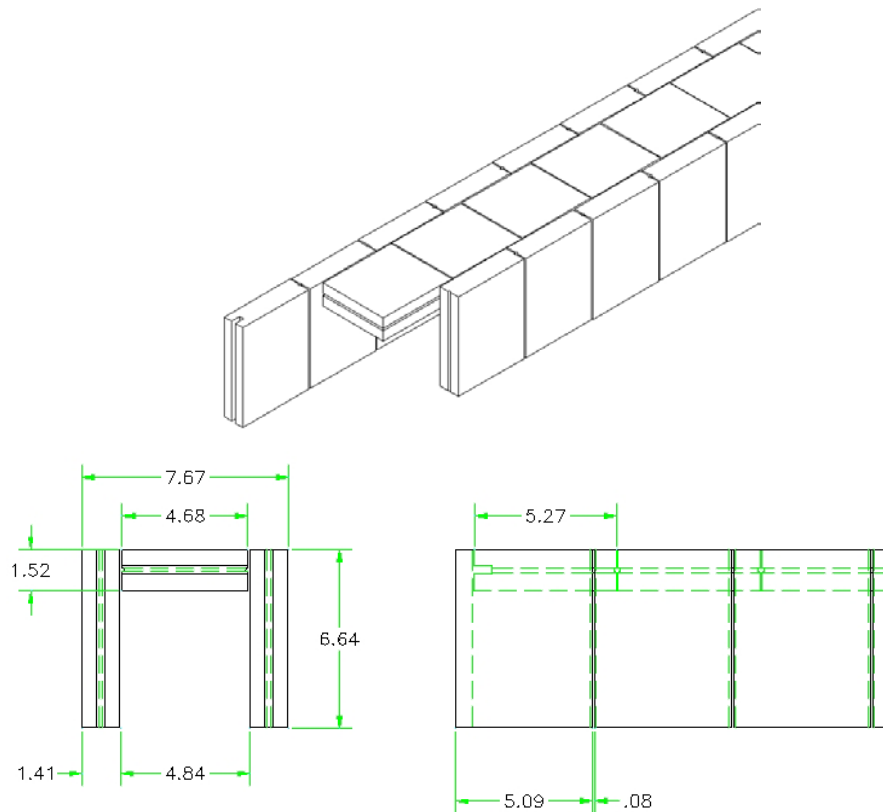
All-ferrite core of RHIC injection kickers (dimensions in cm)
